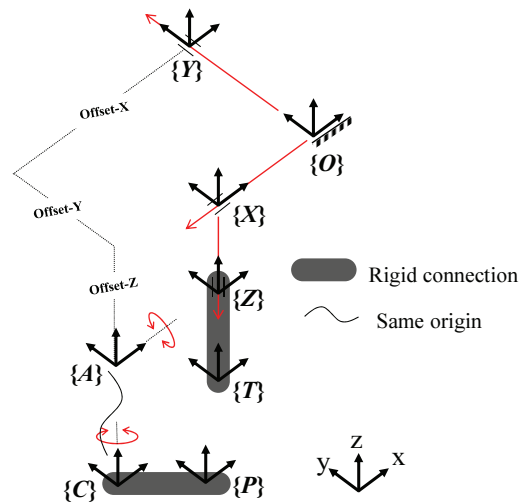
Kinematic chain of a five-axis machine tool (RRTTT type)
